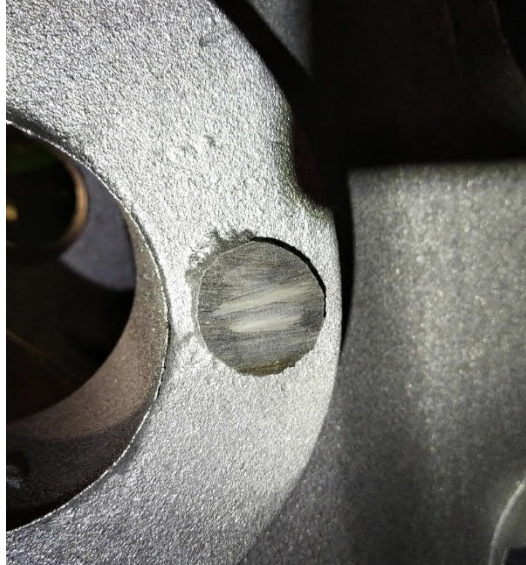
Casting 2 modern exothermic feeder neck with a diameter of 30 mm after feeder removal. The stub can be removed by grinding.
